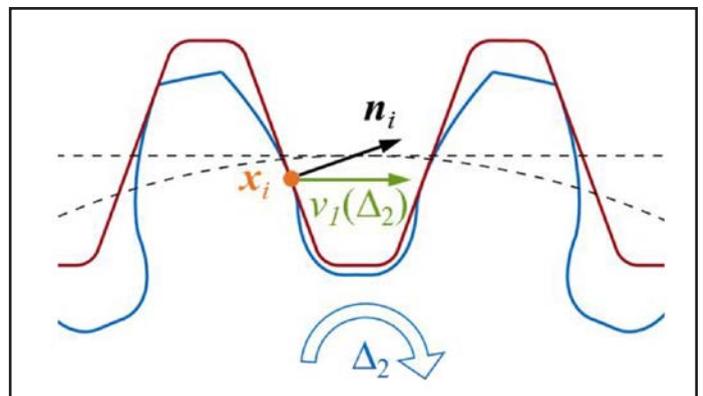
On the basic law of gear kinematics for gear-rack-meshing.
